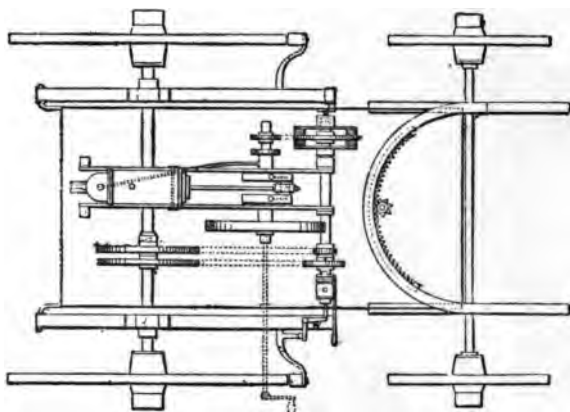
Petter, Hill, & Boll's Oil Motor Carriage (Plan).
